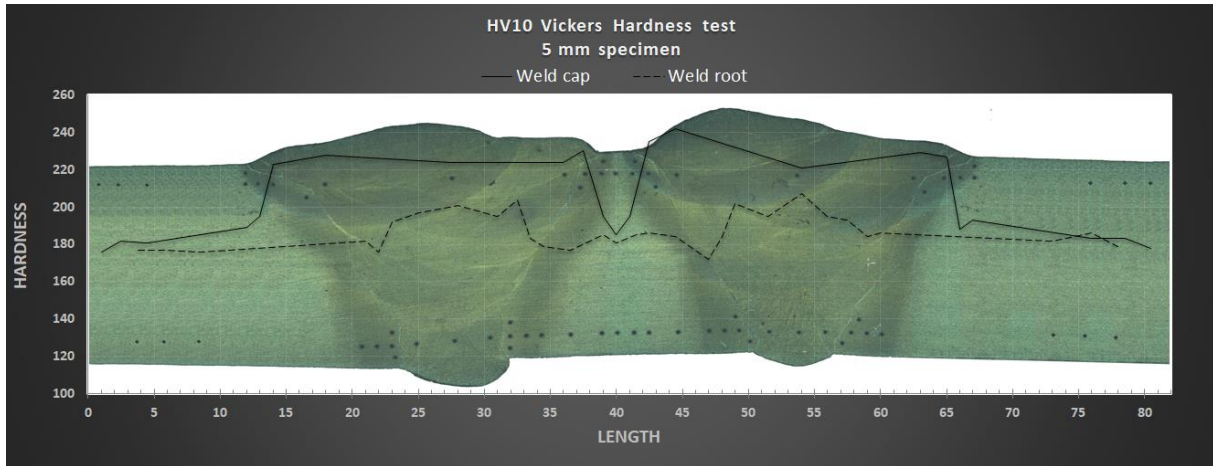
HV Vickers Hardness Test 1.3 mm between the welds.
